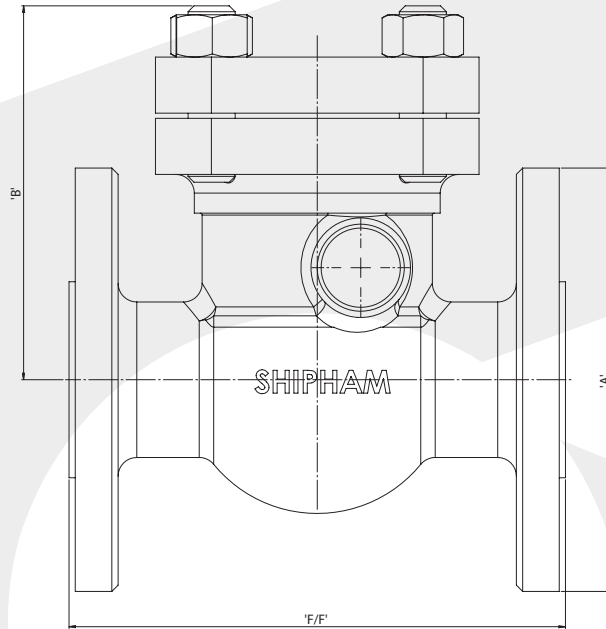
GA drawing swing check valve bolted bonnet (SC04)
